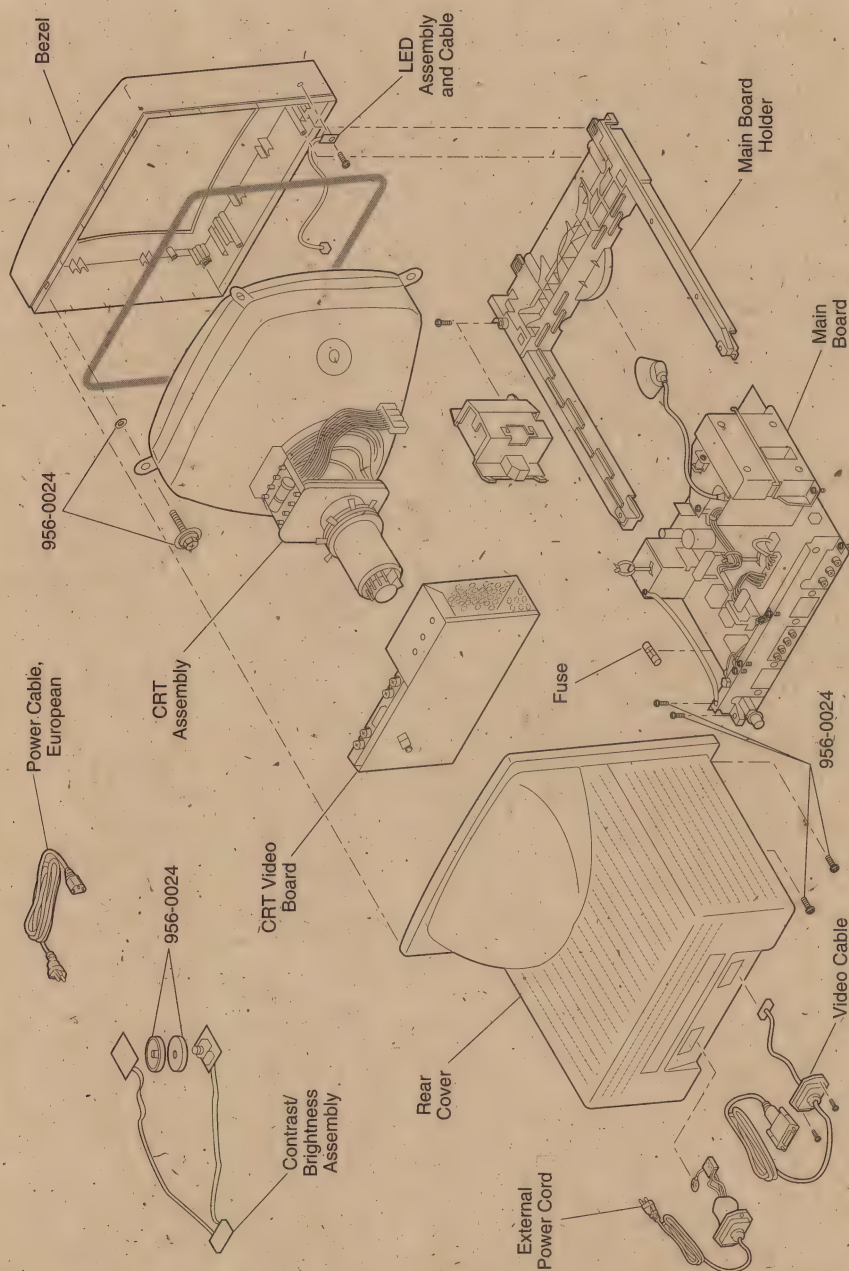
Macintosh 12-Inch RGB Display Exploded View
